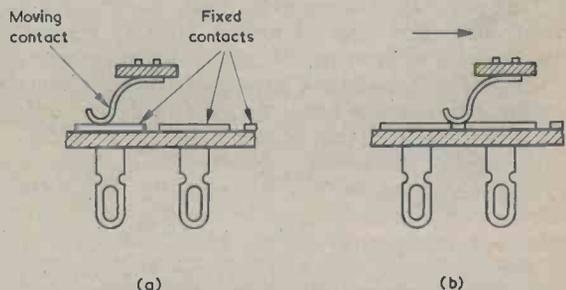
(a). Side view showing two fixed contacts in a typical make-before-break rotary switch.
